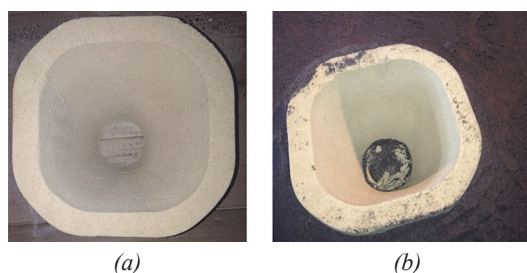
Pouring basin used in the production of castings (a): Pouring basin kept on a table; (b): Pouring basin mounted on a mold
